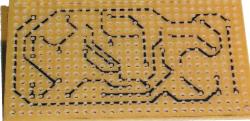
A pattern of traces ironed onto a blank piece of perfboard.
